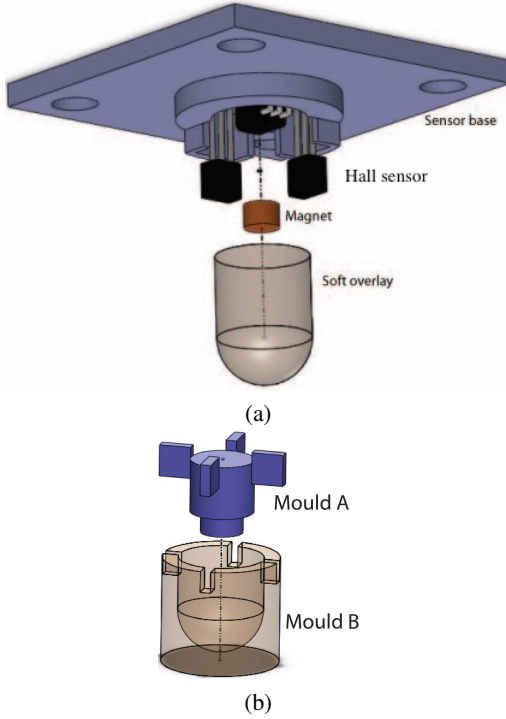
(a) An exploded view of the sensor, (b) The molds used for making the soft element.
